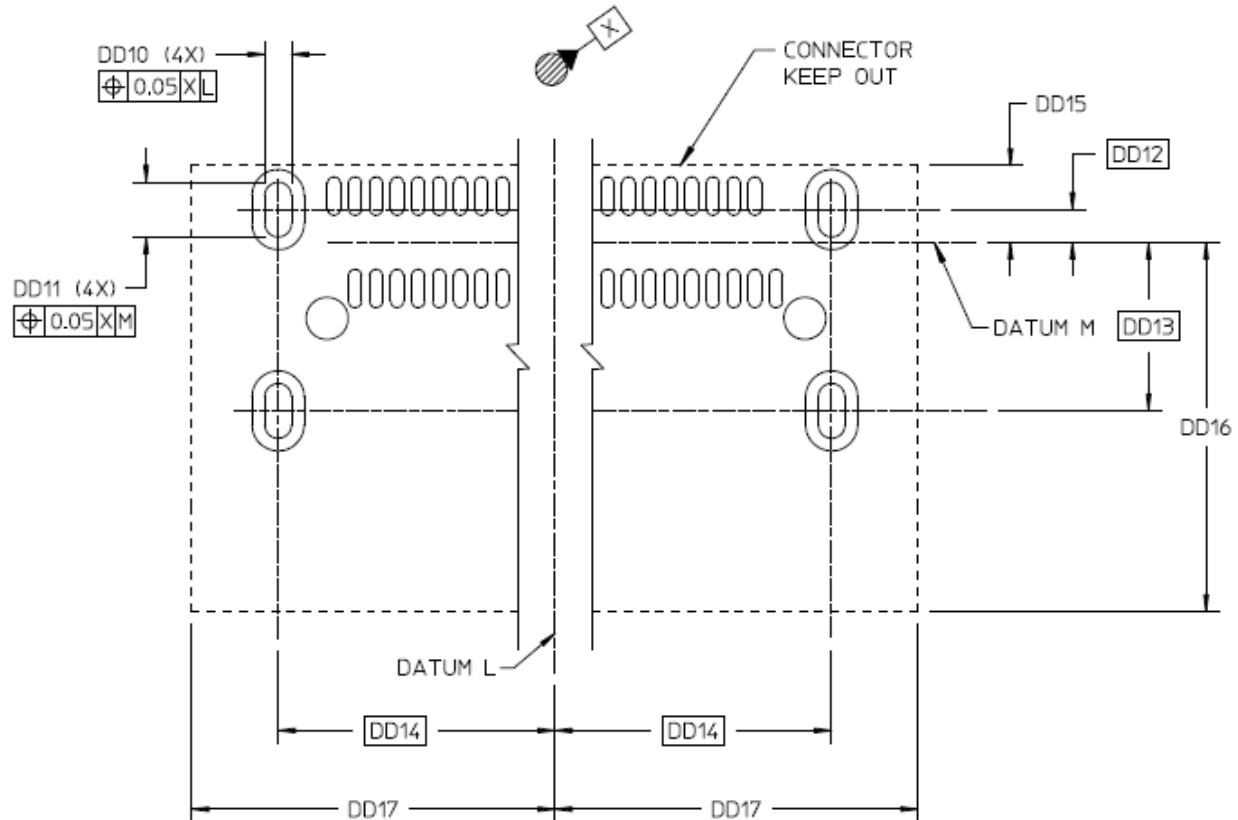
EXAMPLE THROUGH-HOLE FOOTPRINT FOR RIGHT-ANGLE FIXED RECEPTACLES
